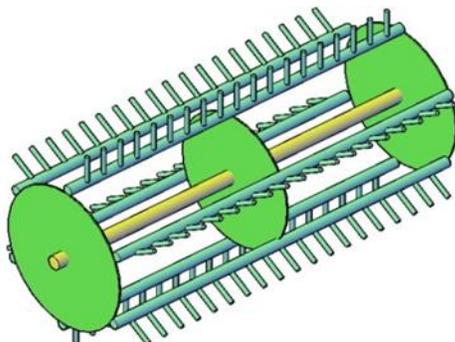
Three Dimensional Drawing of Threshing cylinder using Solidworks software
